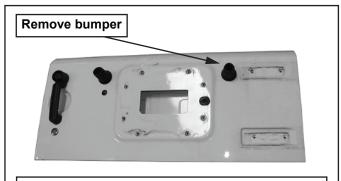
Unplug light and remove 3rd brake light. Pull wire harness for light (with grommet) out through door. Remove factory spare tire mount assembly
